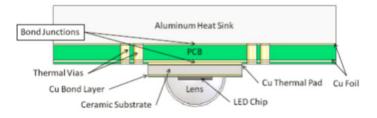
A Typical Surface Mount LED on a Typical PCB [1]
